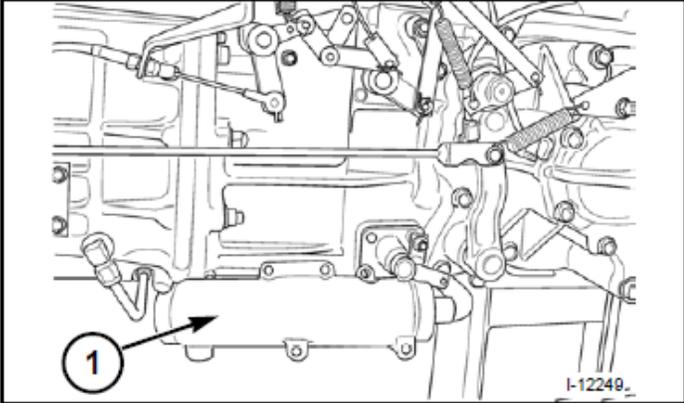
Always replace hydraulic oil filter while oil is removed. Carefully unscrew oil filter (1) from its adapter. Use of a filter wrench may be necessary.
